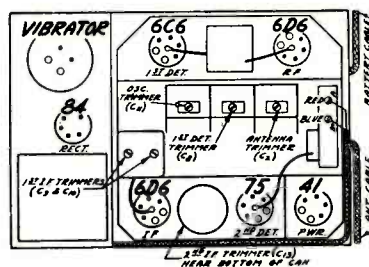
Chassis for the Wells-Gardner Series 6S, showing location of parts and trimmers.
